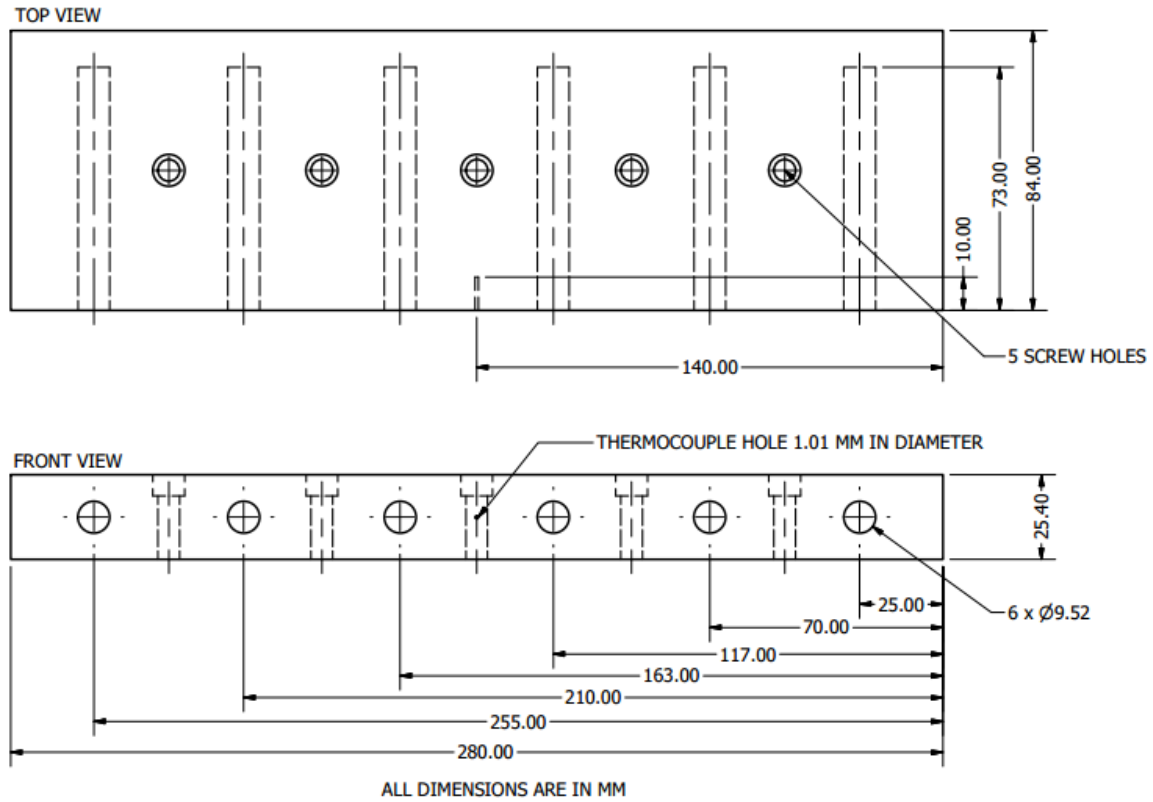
Detailed drawing of the copper spreader showing the design and dimensions, shown top and front view.
